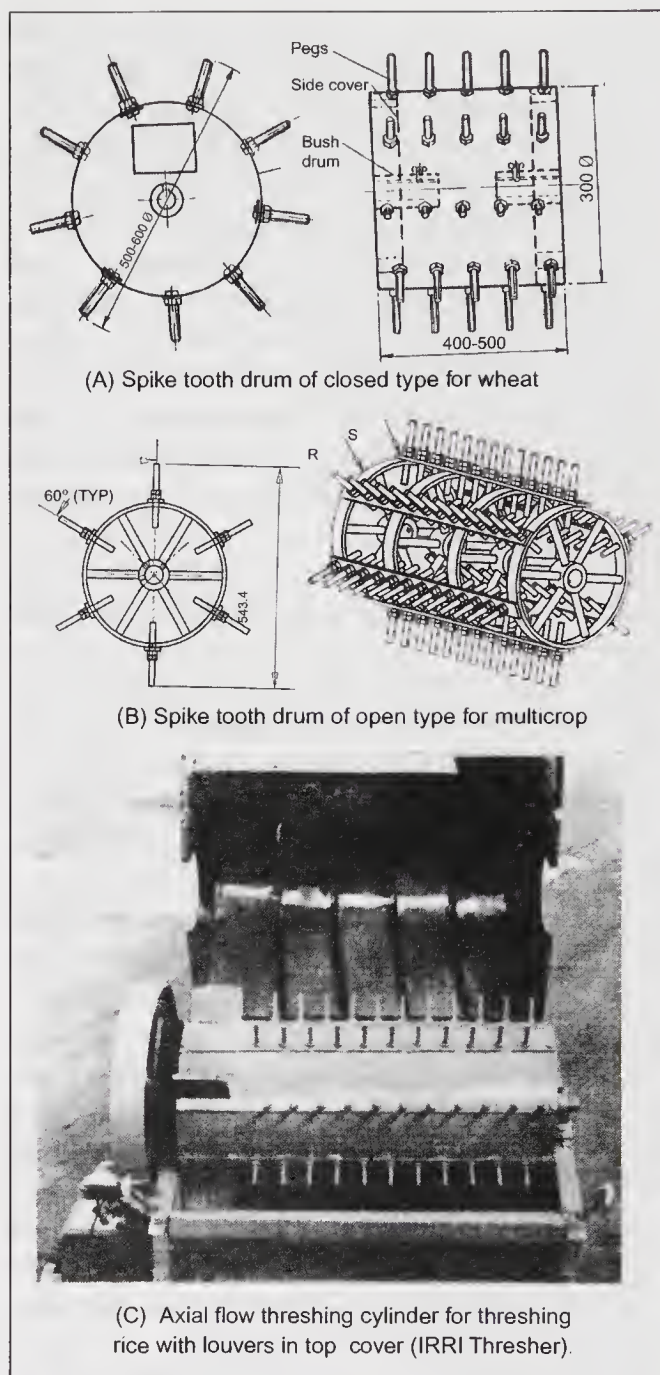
(A-C). Details of spike tooth drums of open and closed type.
